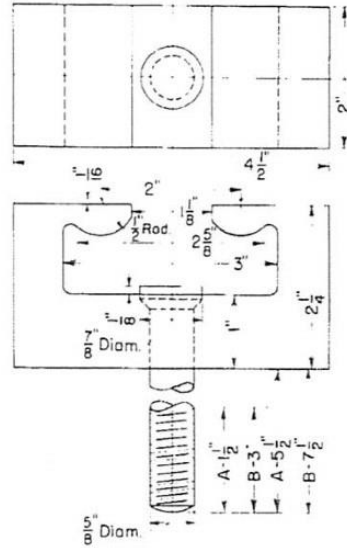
Tension-Perpendicular-to-Grain Test Assembly
